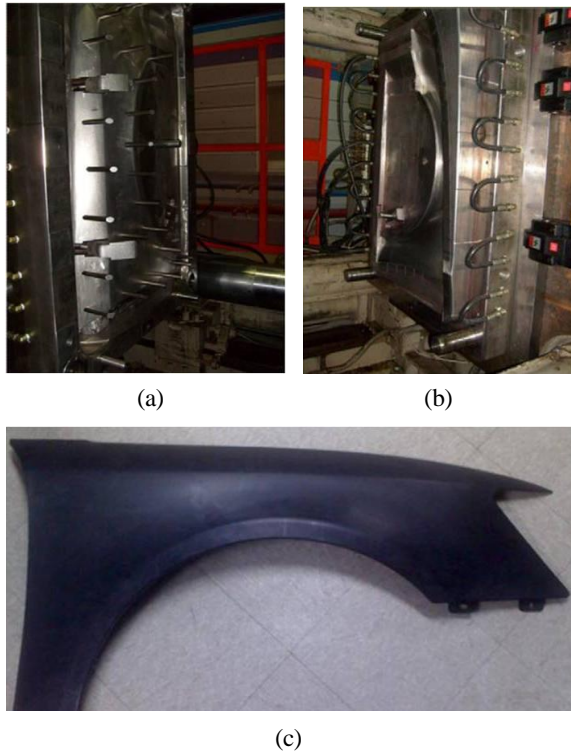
The prototyping mold and plastic car fender: (a) movable die, (b) stationary die, (c) molded part.
